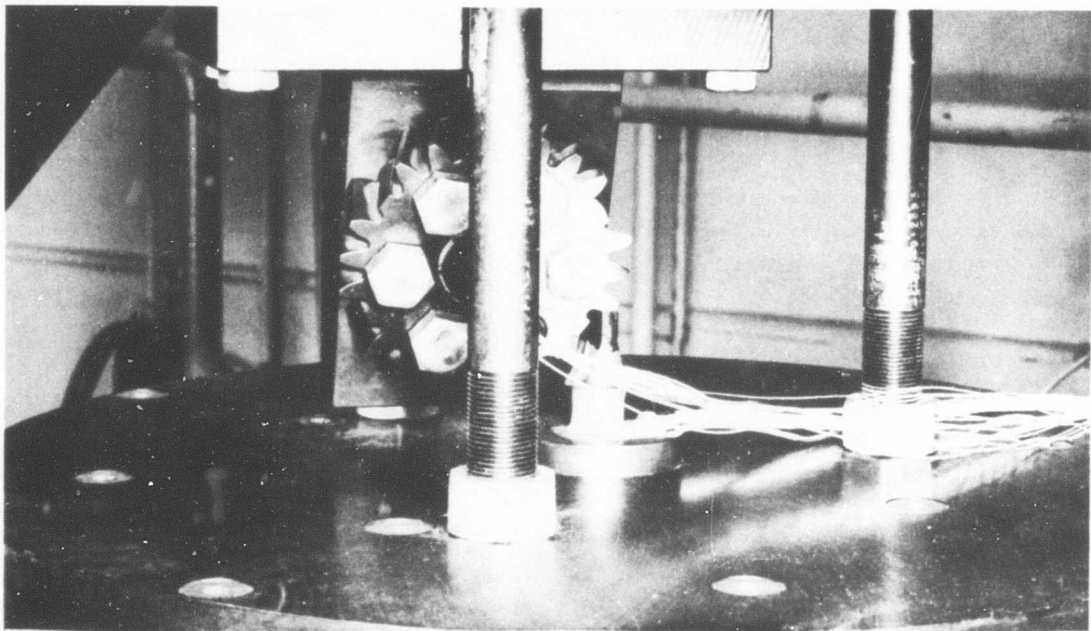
Fatigue Rig Indexing Fixture, Mounted Test Gear, and Load Member Shown in Test Position.
